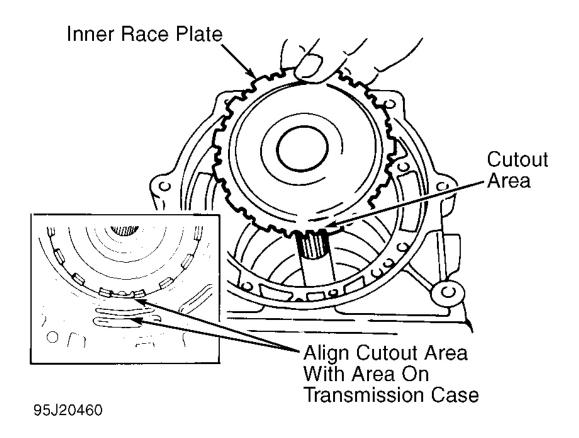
Installing Inner Race Plate Courtesy of ISUZU MOTOR CO.
